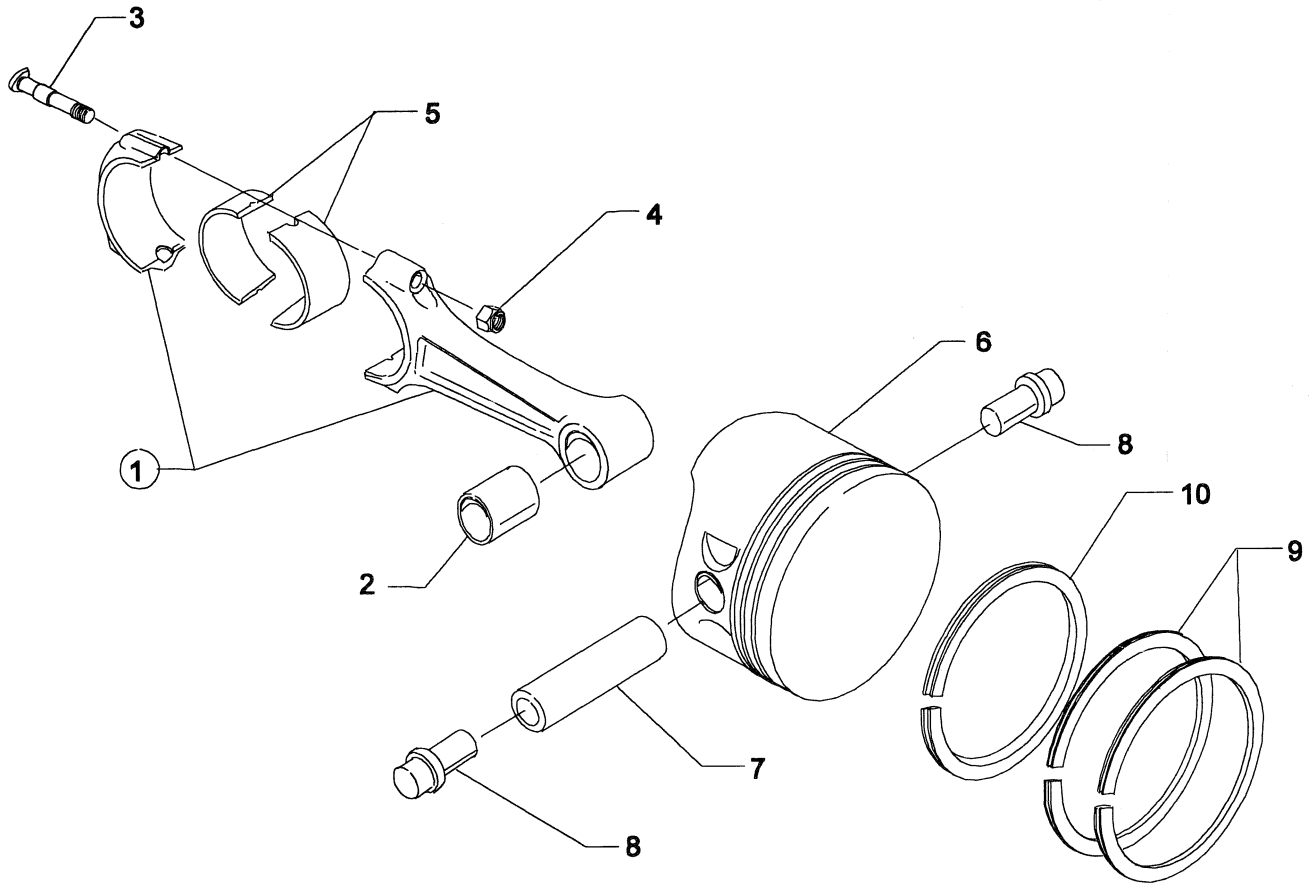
CONNECTING RODS, PISTONS AND RING ASSEMBLIES
